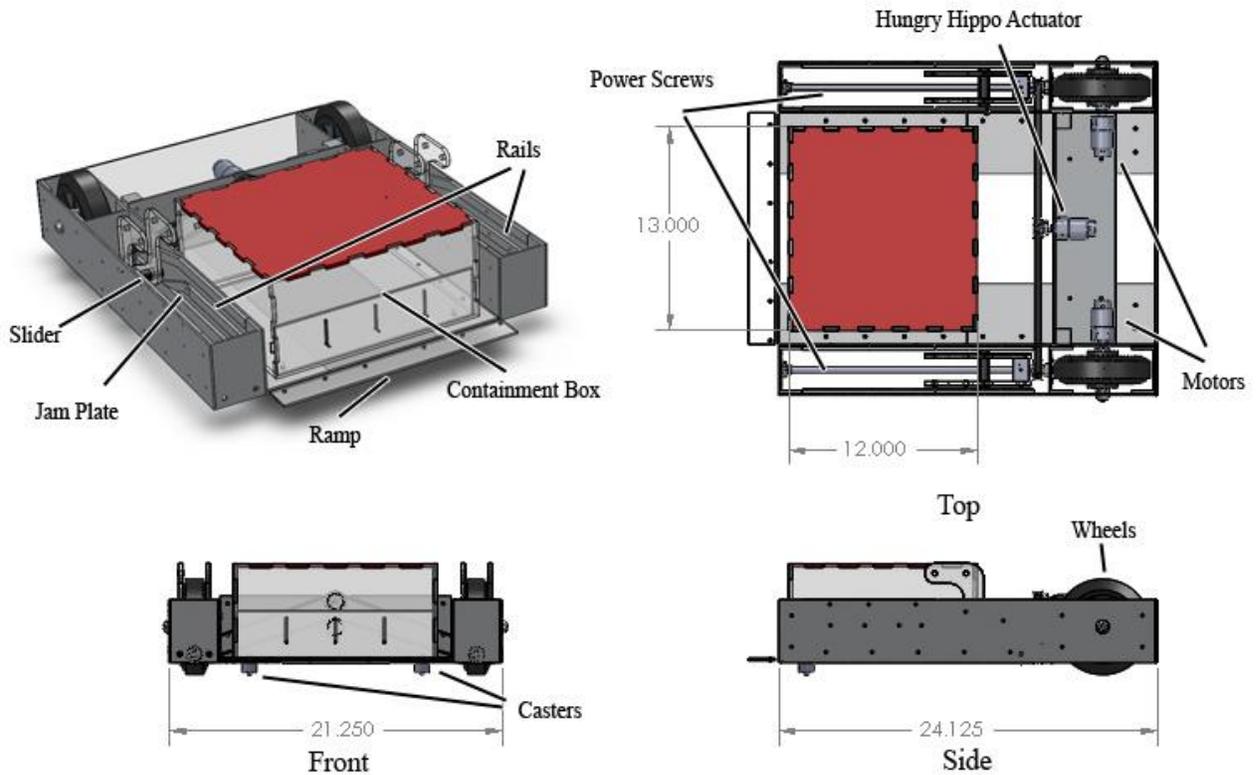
Multi-view drawing of first prototype (all dimensions in inches)
